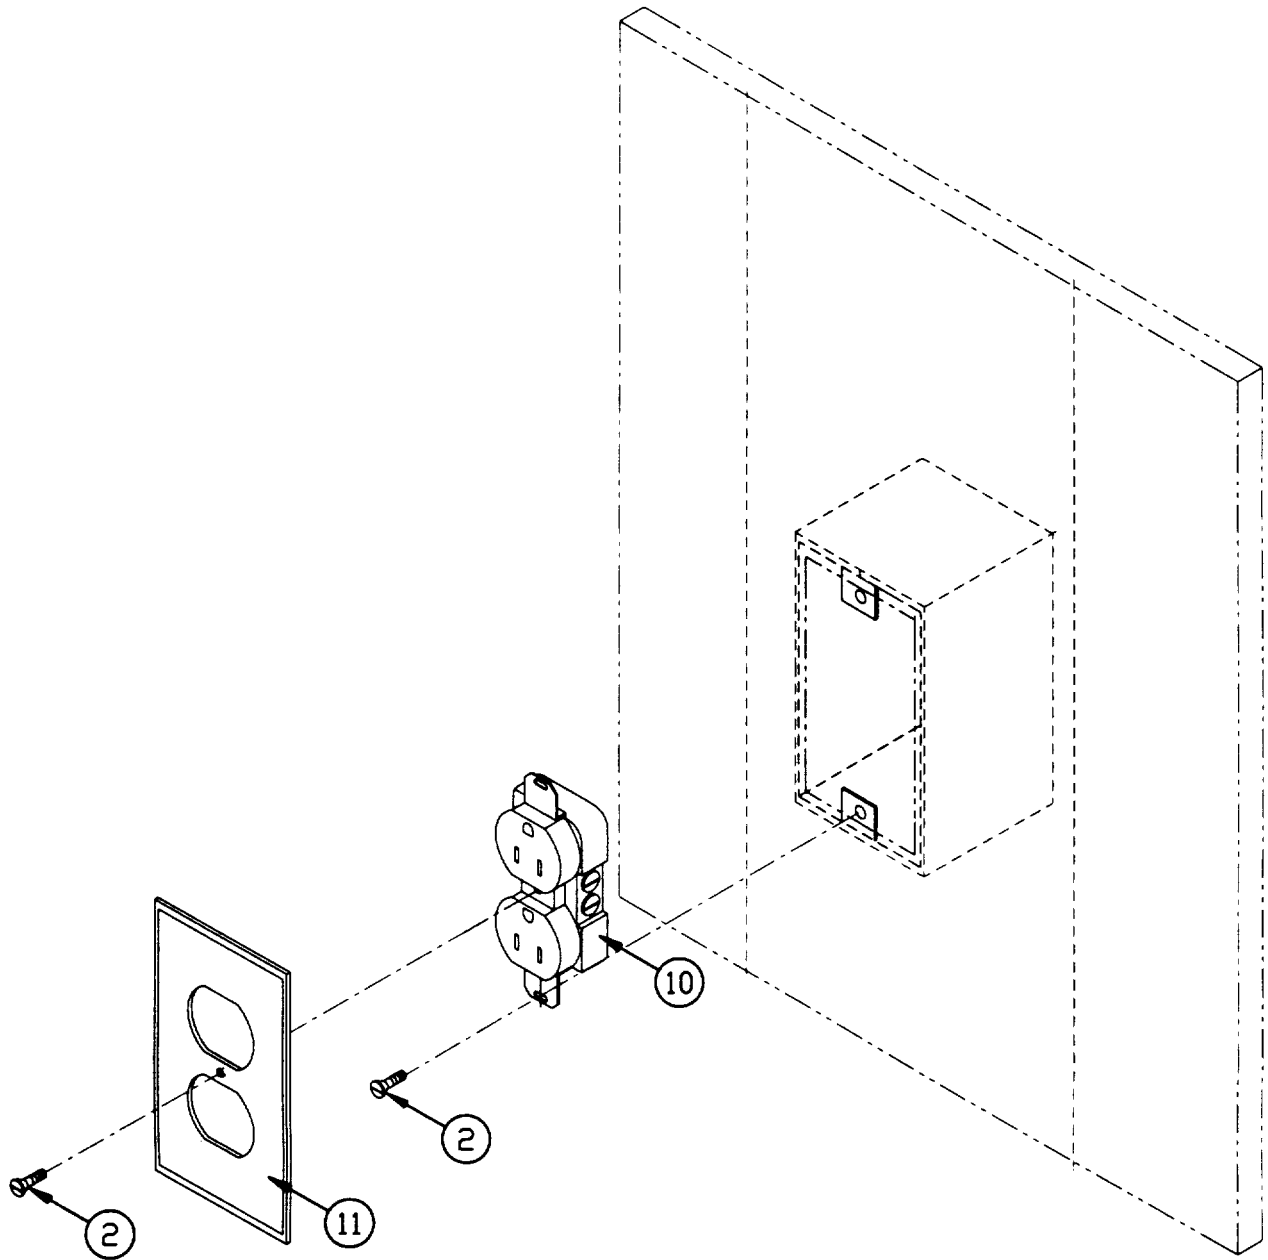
ELECTIRCAL ASSEMBLY (SHEET 3 OF 7)
